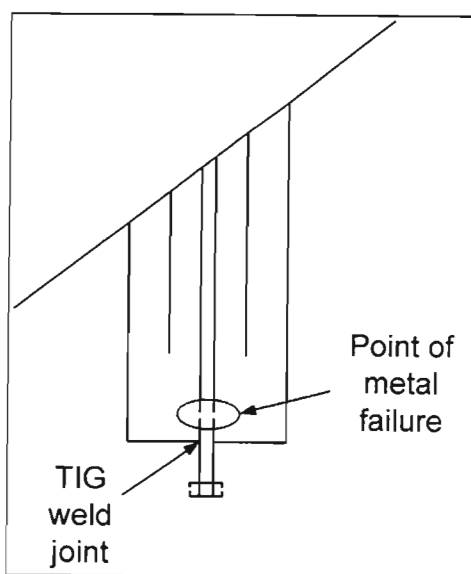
Sketch indicating point of failure of black liquor tube.
